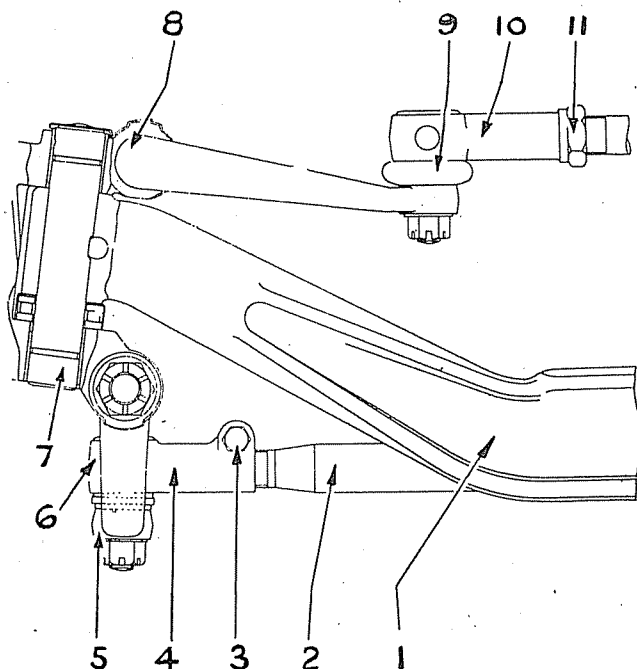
Assembly of Tie Rod and Drag Link. (3-59A, 6-71A, 8-65A, 8-71A, 8-71A-D).
